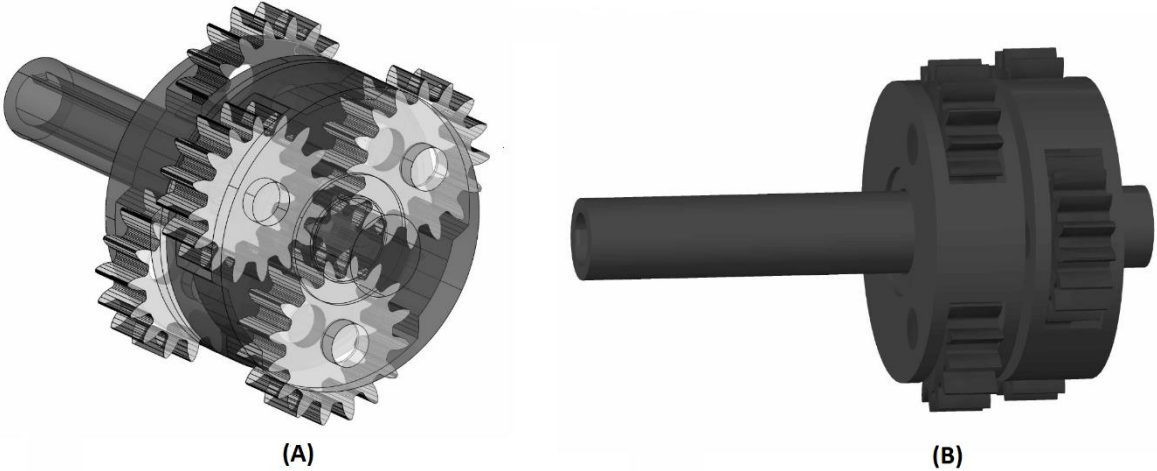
Gear wheels, (A) x-ray- and (B) realistic-view.
